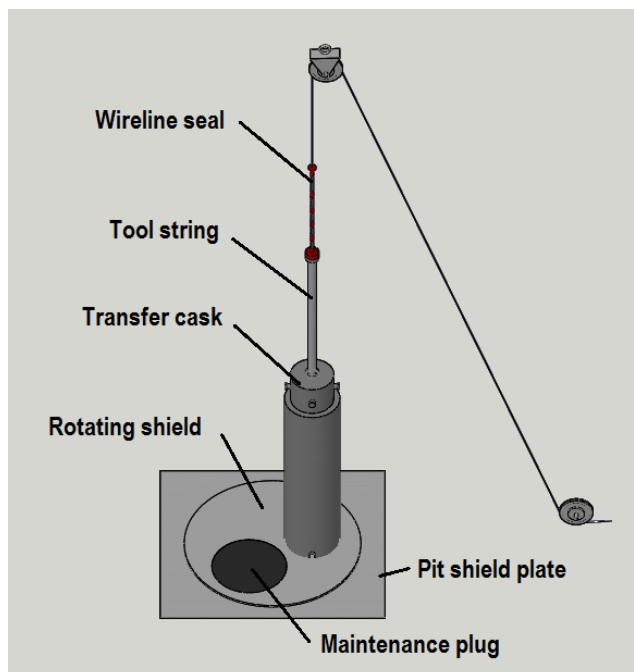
Transfer cask over the wellhead carousel and pit shield plate.
